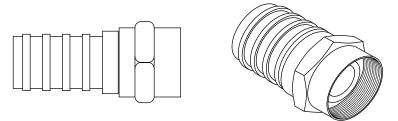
Model 7161 RG6U coaxial cable F-type connector
